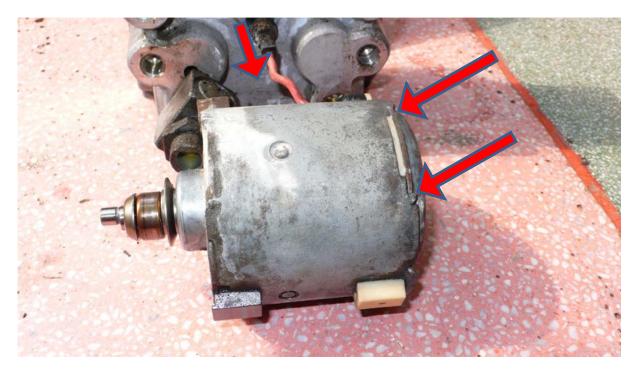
After removing the two motor Torx screws, and pulling off the black plastic cover along the top of the motor, the motor can be carefully extracted from the valve block.
